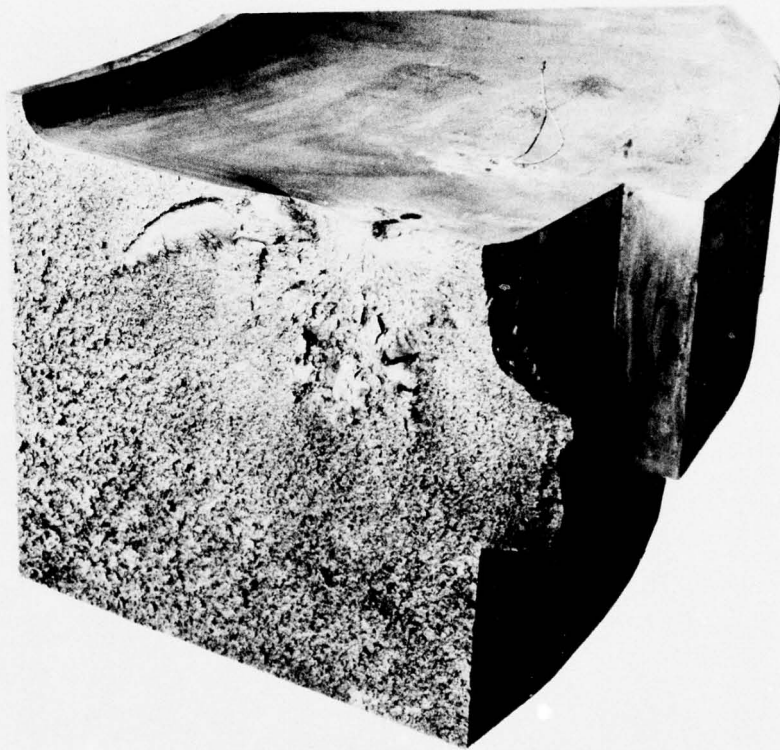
Fracture of massive ring forging, 12 × 13 in. (300 × 325 mm) in cross-section, caused by tiny cracks subjected to high residual stress. The dark spot in the smooth region of the fracture (upper right corner) marks the position of a thermocouple braze that contained tiny cracks.
